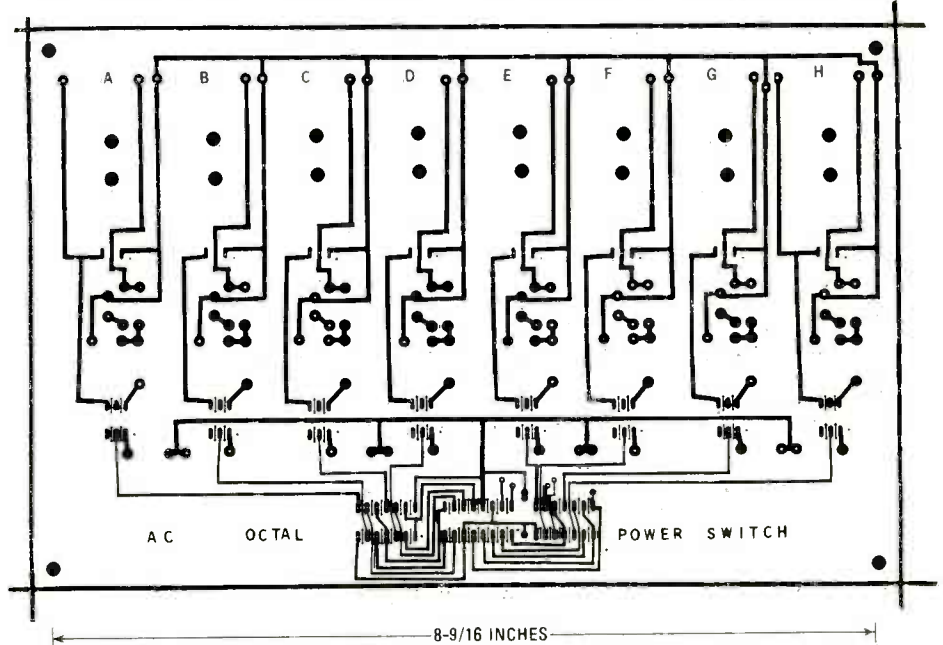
AC CONTROLLER is built using an easily laid out PC board.
